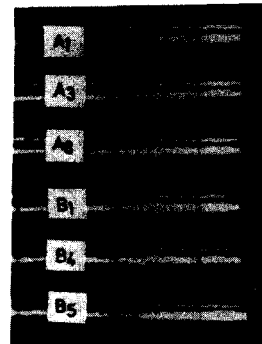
Appearance of fractures of tensile tested specimen (F.W.) (SM45C side) numbers are welding conditions spec. No.
